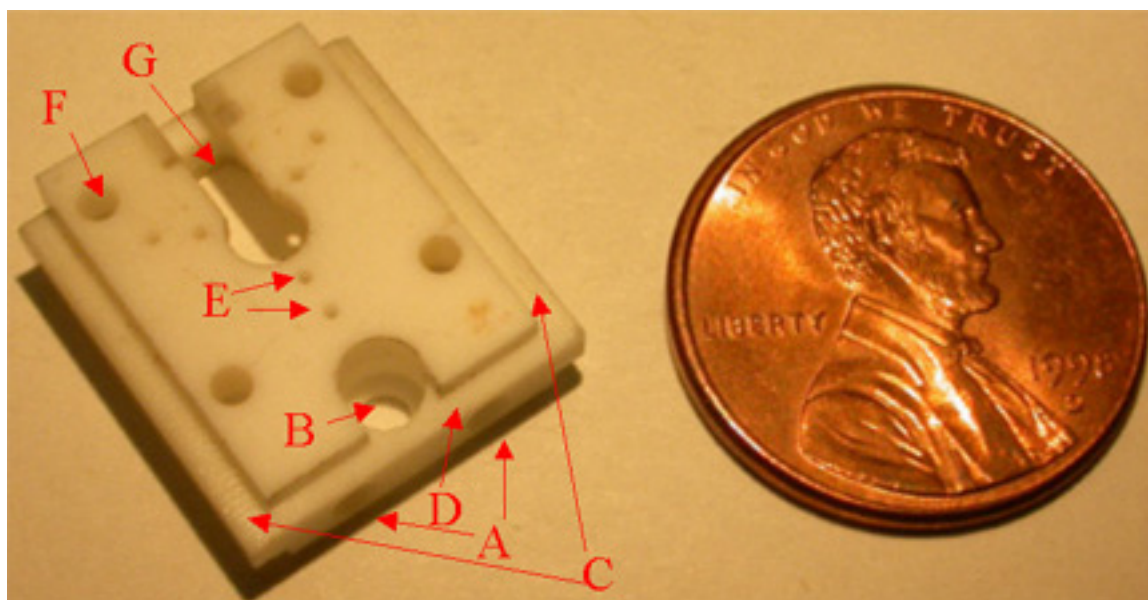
Top view of a mock Macor sample holder shows two alignment holes (A) for wobble stick manipulation and a clearance hole (B) for it to grip onto. The holder contains two “wings” (C) to slide into a four-finger fork, and a rear ledge (D) and a front cavity (not shown) for a simultaneous interaction with a three-finger fork. The top surface shows two circular sets of holes (E) for mounting sample from the back side with glass ball contacts by four 2-56 screws (F). A cutaway in the top surface (G) allows holder manipulation within the STM without significant tip retraction.
